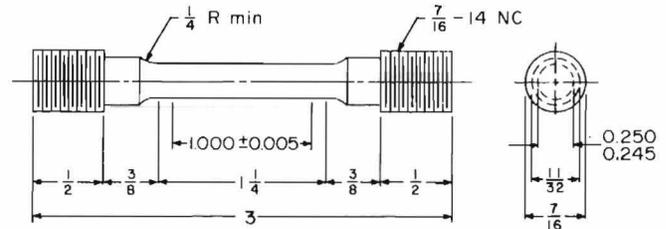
Tensile test specimen. (Measurements in inches.)
